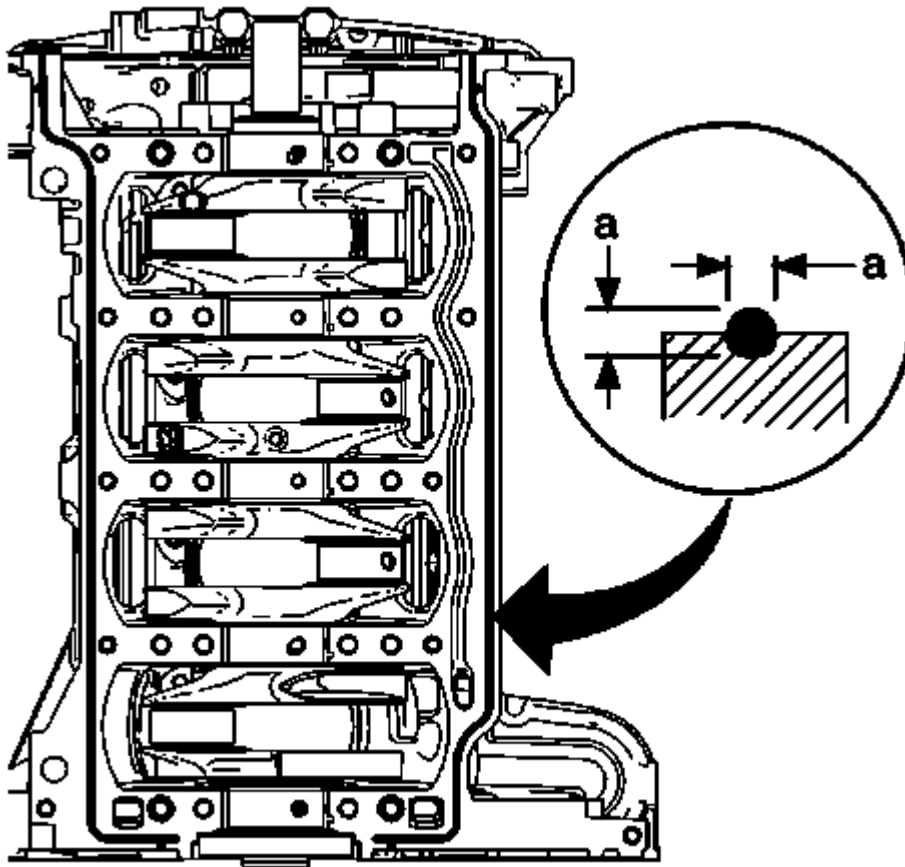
View of Bead of Sealer on Bedplate Mating Surface
